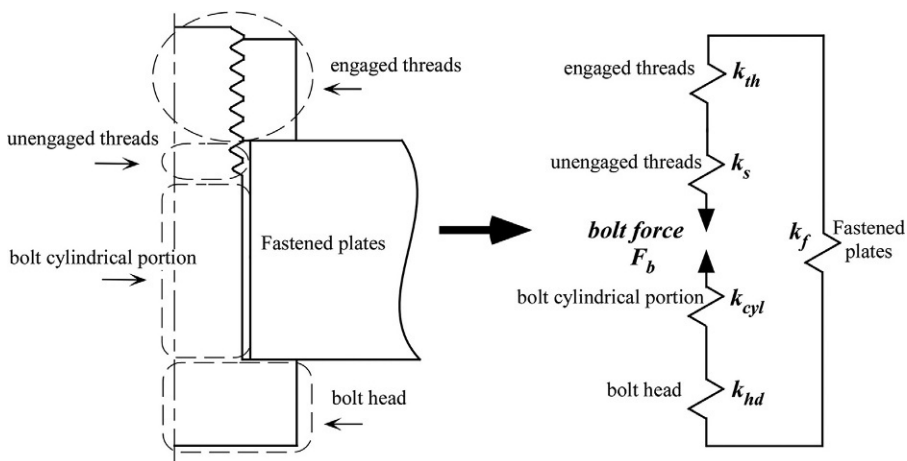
Stiffness of a bolted joint represented by five one-dimensional spring elements.
